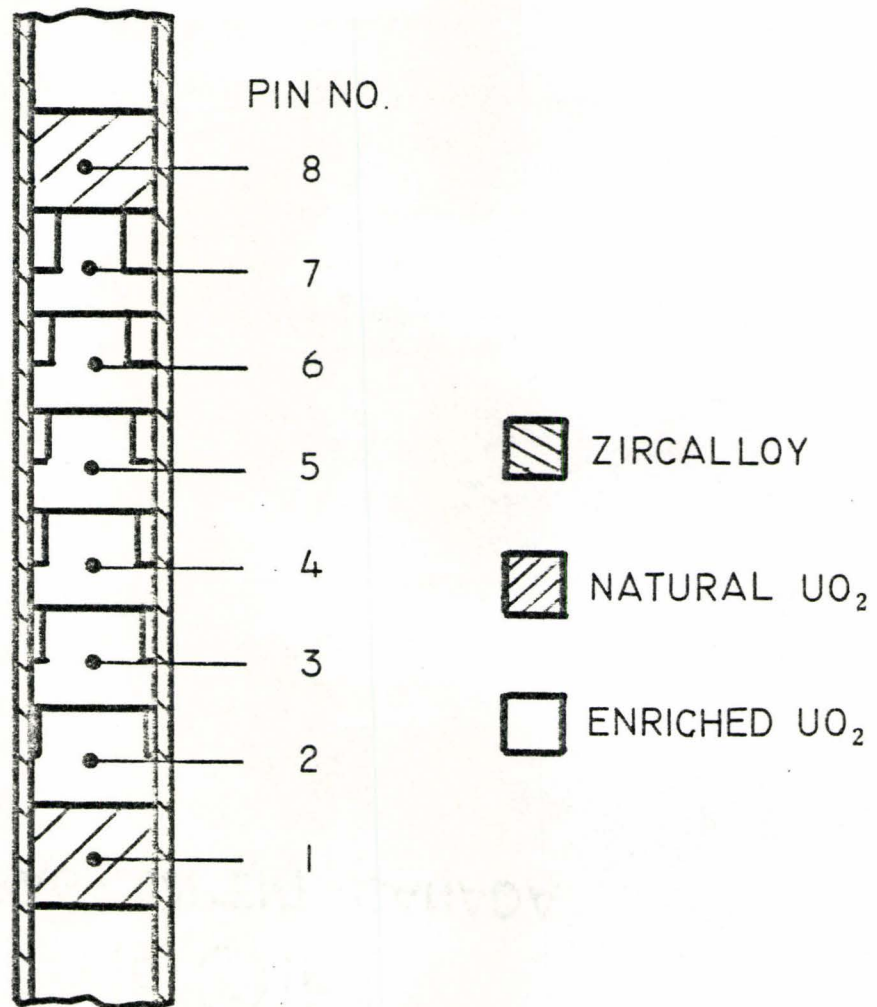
The construction details of the RISO model fuel element. The end-caps and the retaining springs are not shown.
